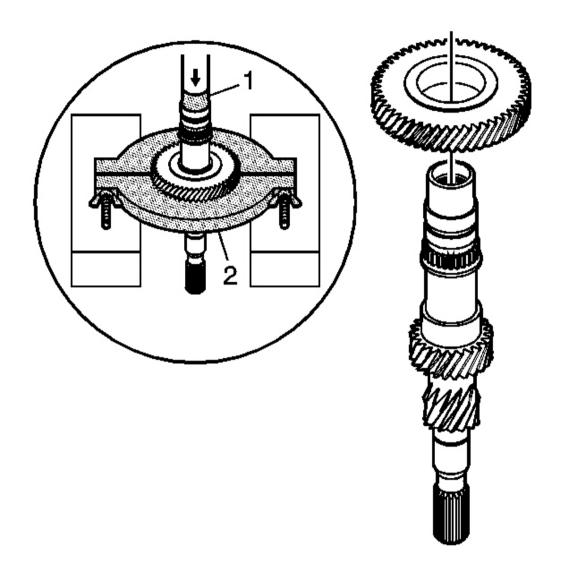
Pressing Off 5th Gear Courtesy of GENERAL MOTORS CORP.
